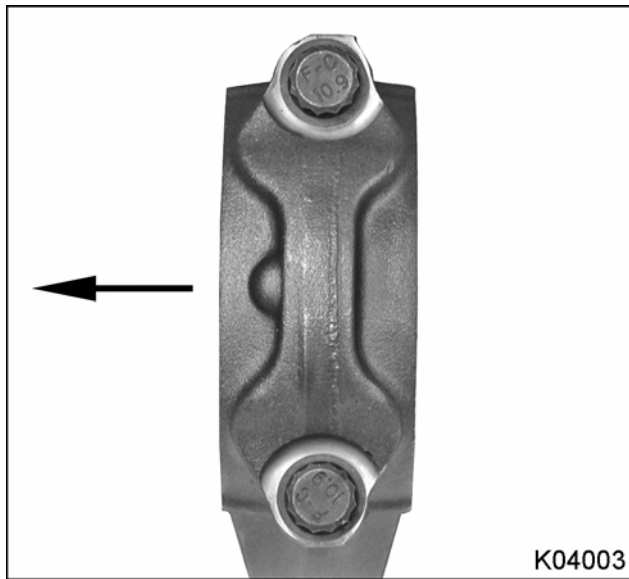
Connecting rod cap with M11 connecting rod cap bolts (protrusion points to front of engine)
